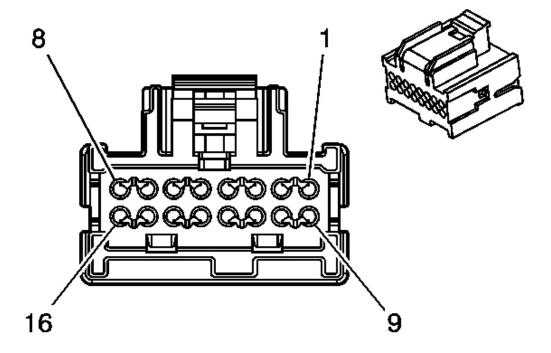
Accessory Switch Connector End View Courtesy of GENERAL MOTORS CORP.
